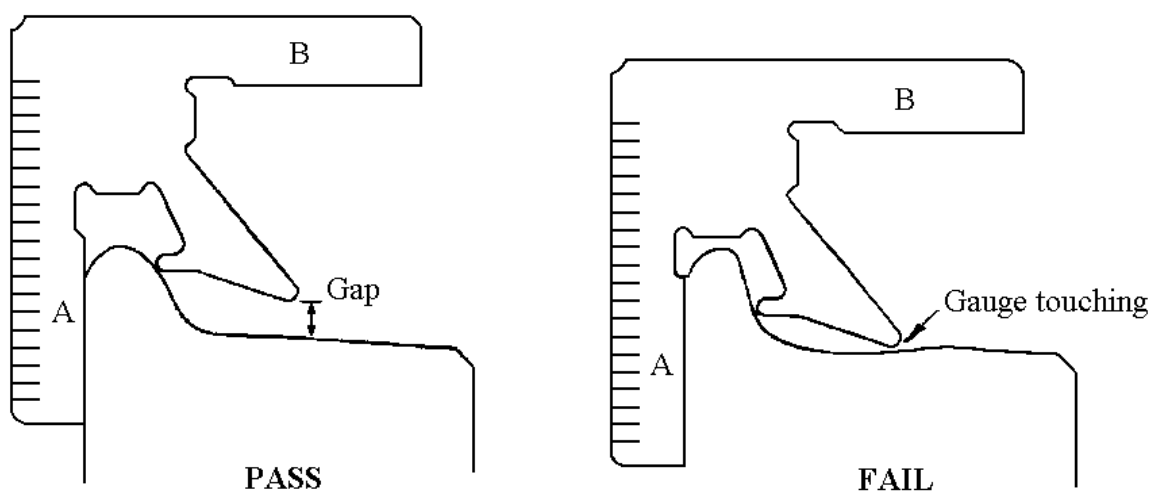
Use of GO/NO GO Flange Thickness and Height Gauge (BR Cat. No.39/29839) to measure Flange Thickness
